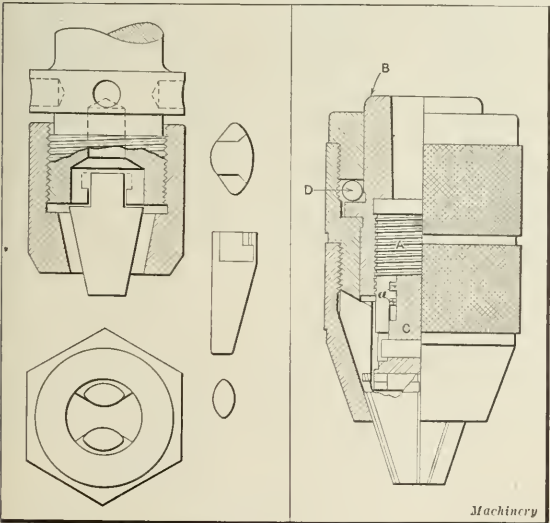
Chuck for Grooved Shank      Fig. 13. Horton-Morrow Drill Chuck with Ball Bearing
